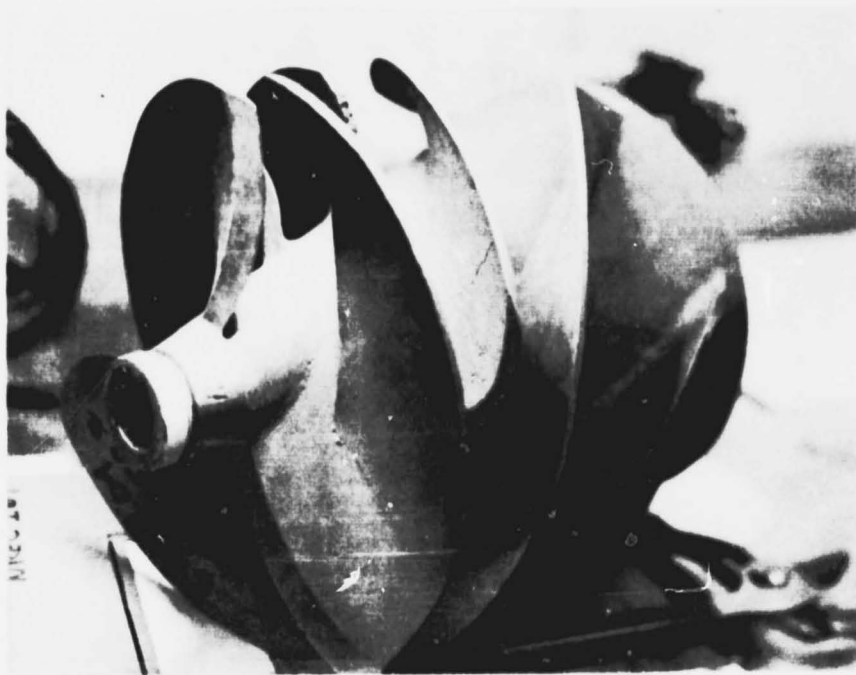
CAVITATION DAMAGE TO INDUCER IMPELLER
